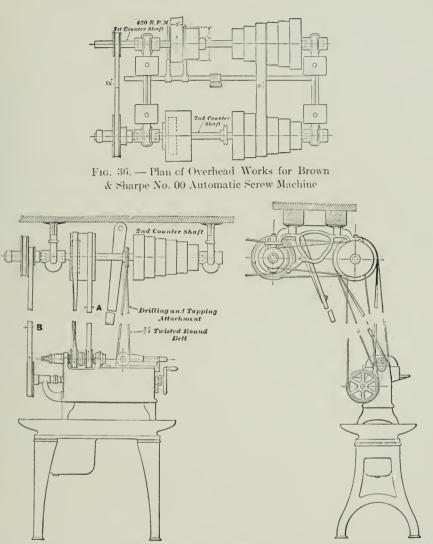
Front and End Elevations of Overhead Works for Brown & Sharpe No. 00 Automatic Screw Machine
